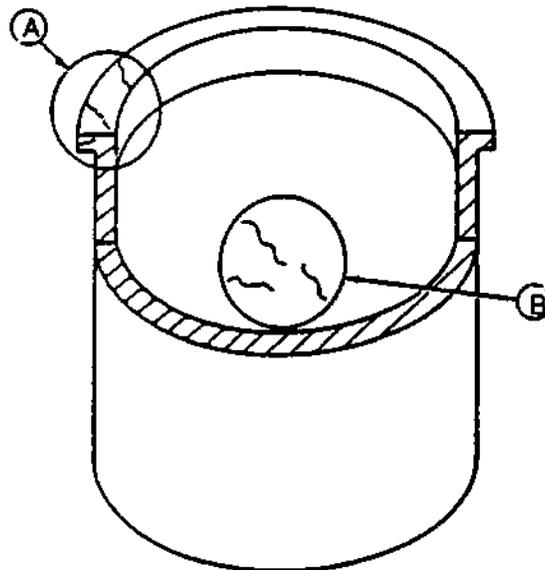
Inspecting Cylinder Liner for Cracks
